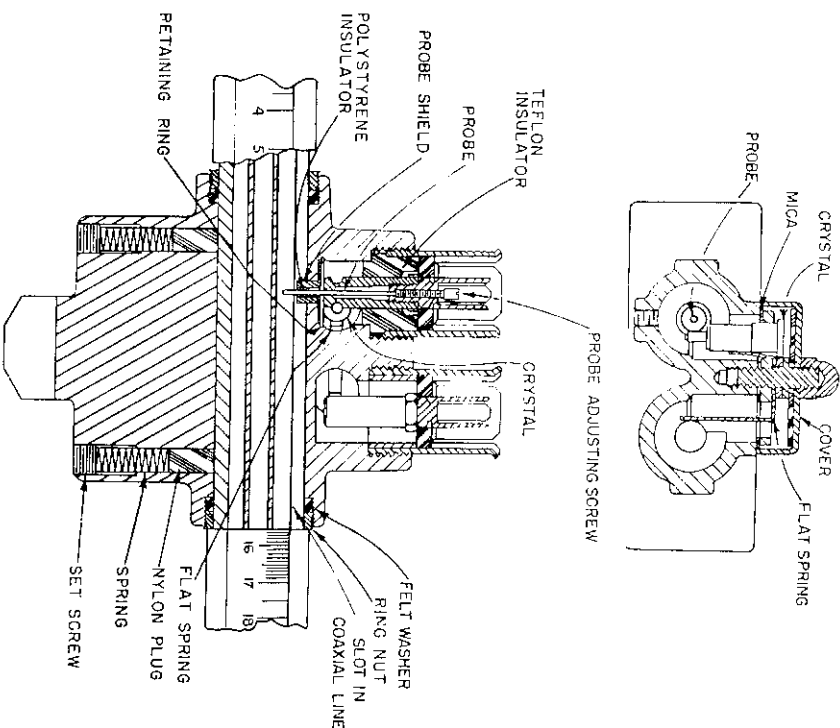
Cross-sectional views of the carriage on the Type 874-LBA Slotted Line, showing the crystal mount and the adjustable probe.
